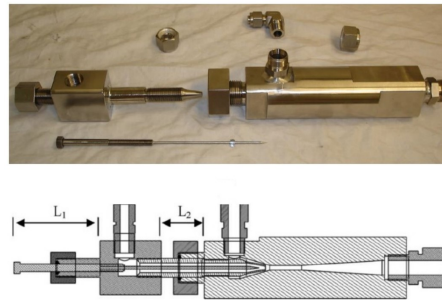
Photo of the adjustable ejector with technical drawing of the ejector [87]
